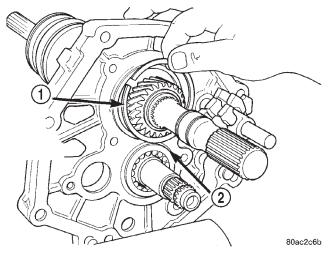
Remove Output Shaft Rear Bearing Snap-ring
